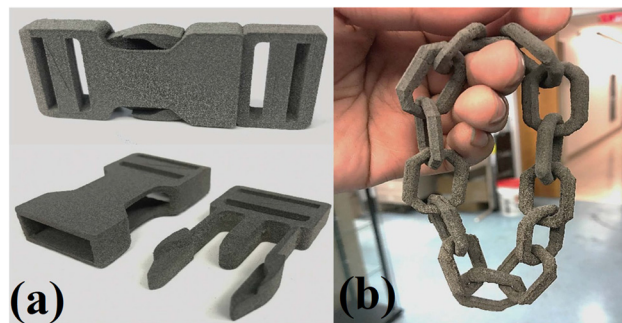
Composite parts manufactured by SLS; (a) two-part buckle and (b) circular chain, adapted from ref. 112 (open access).
